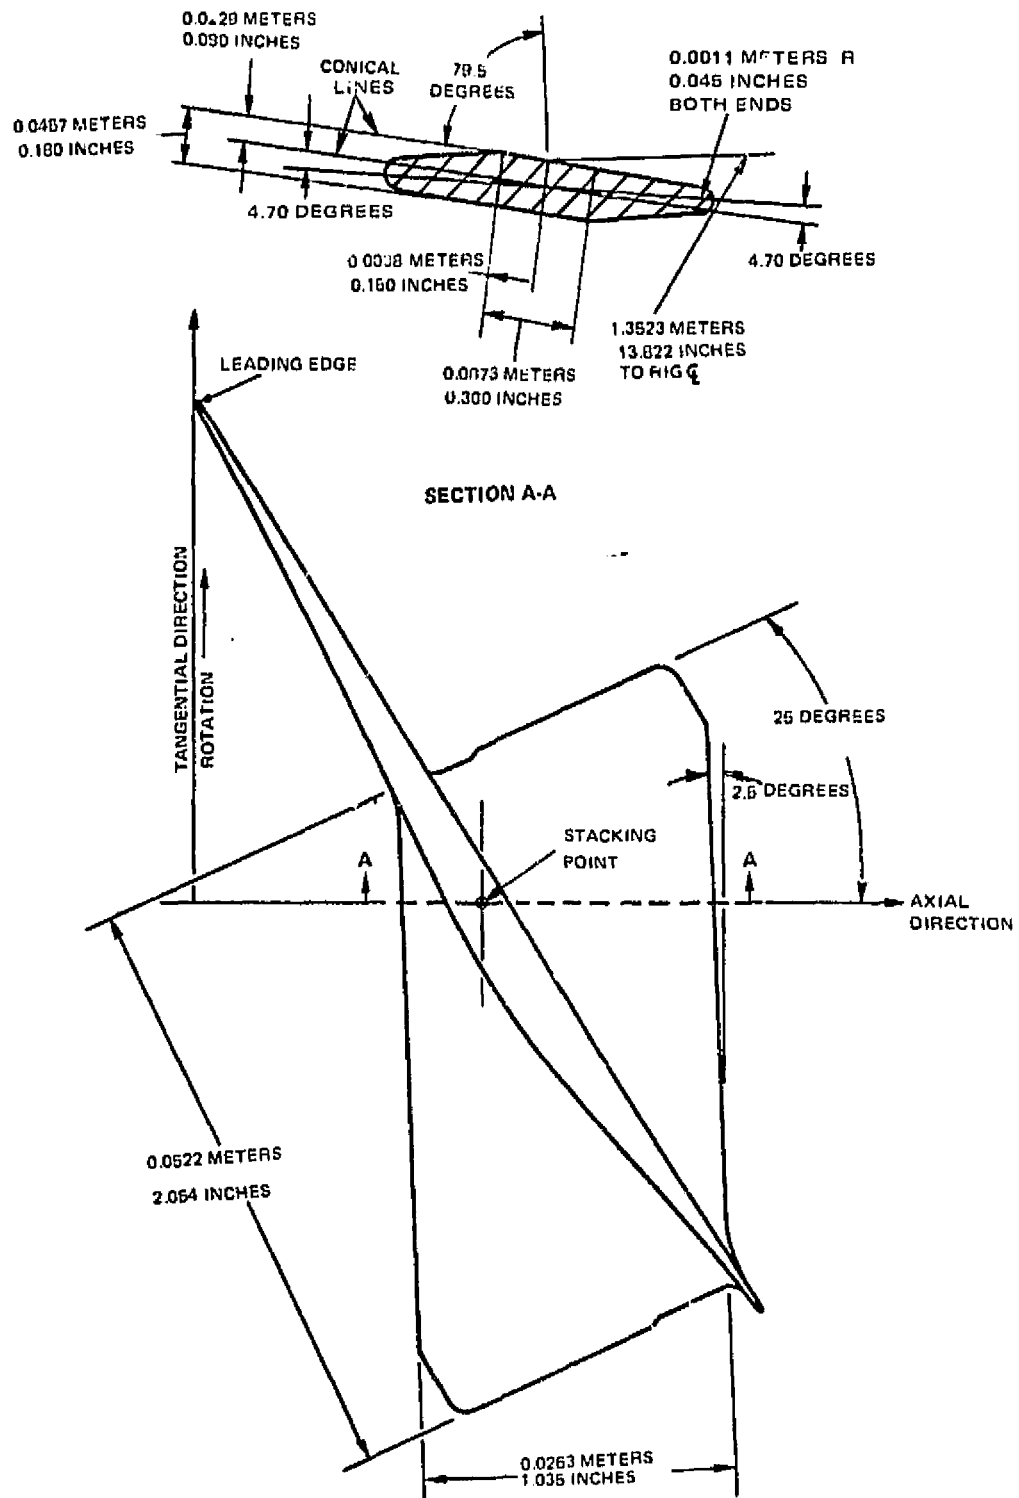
Top and Sectional Views of Rotor Blade Partspan Shroud
